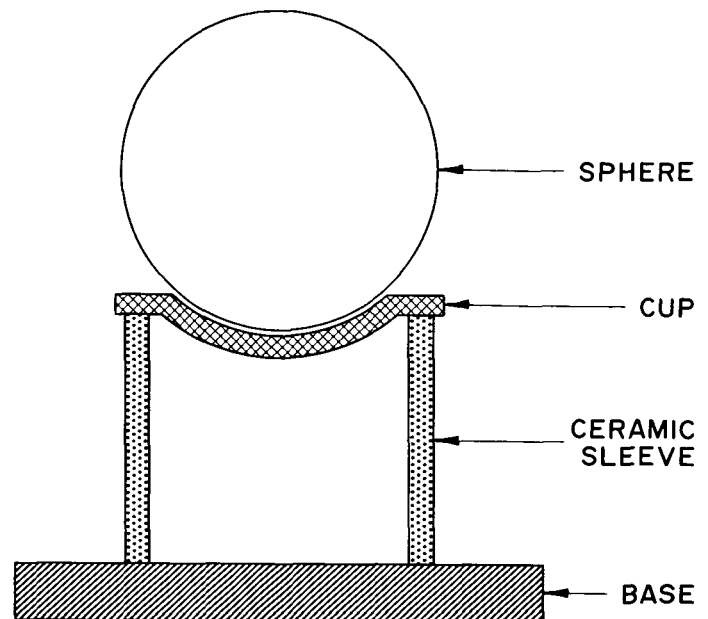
SPHERICAL SQUEEZE FILM BEARING
